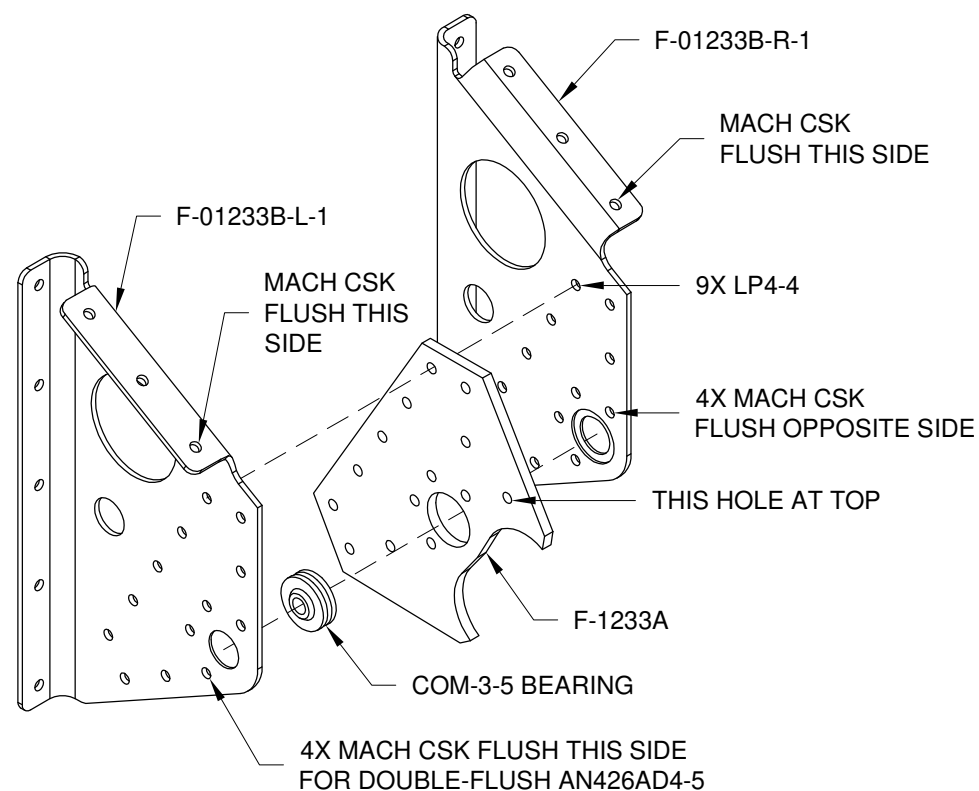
CONTROL COLUMN MOUNT ASSEMBLY
